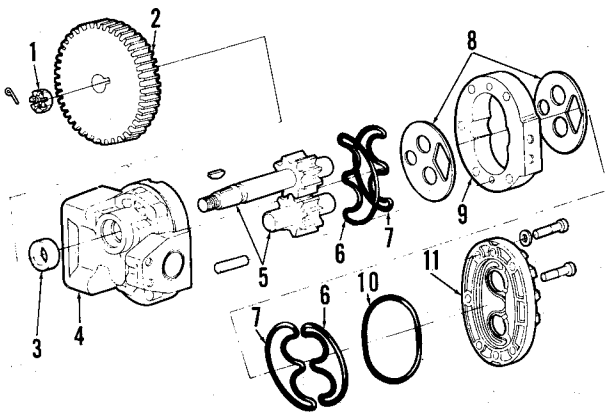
Exploded view of hydraulic pump used on Model TW-30.
